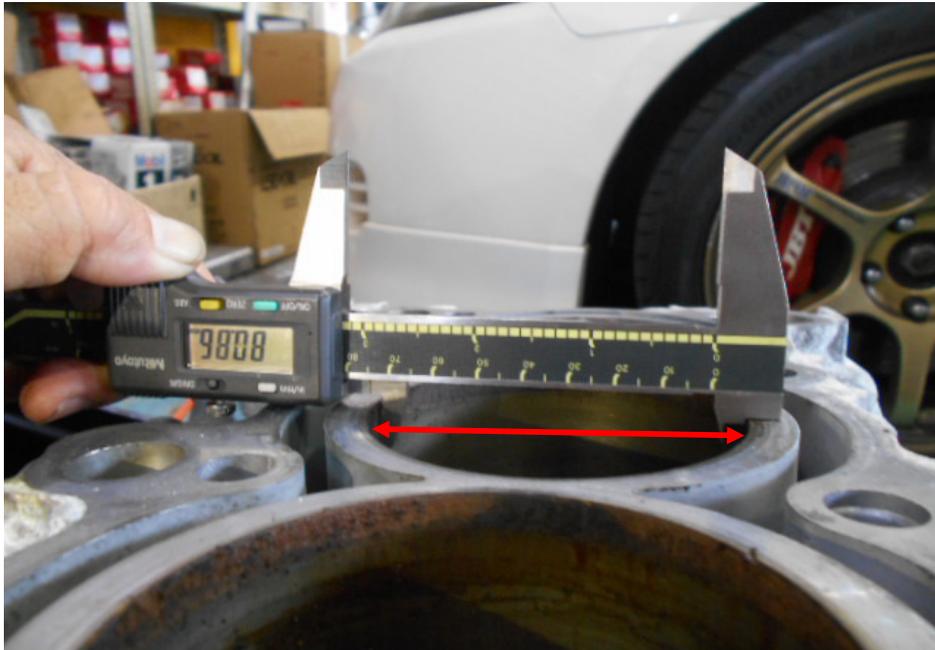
shows the bore measurement of cylinder 2, which was recorded to be 80.40mm.
